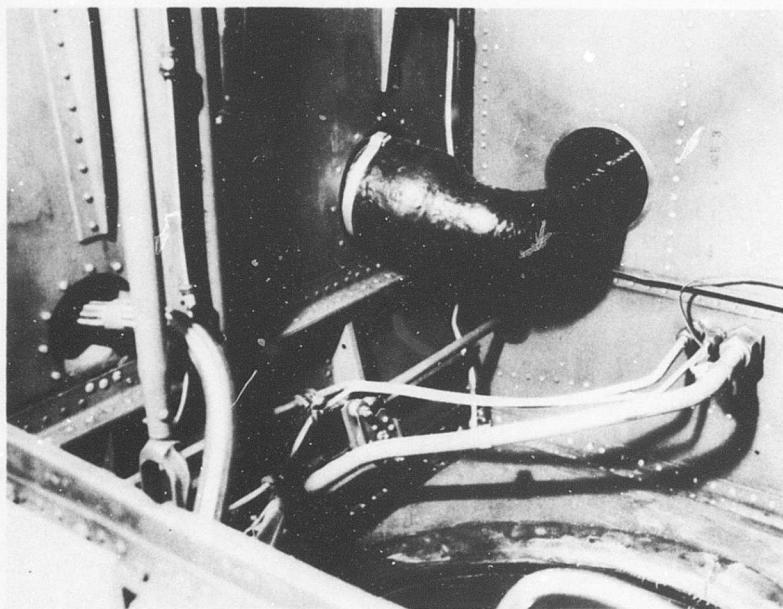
Aft Crossover Tube Attachment to Right Fuel Cell in Cargo Suspension Unit Compartment.
